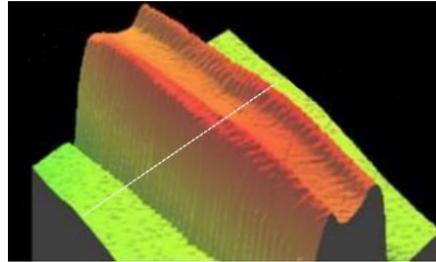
A 3D inspection of a silicone bead on which the needle left a groove while dispensing
